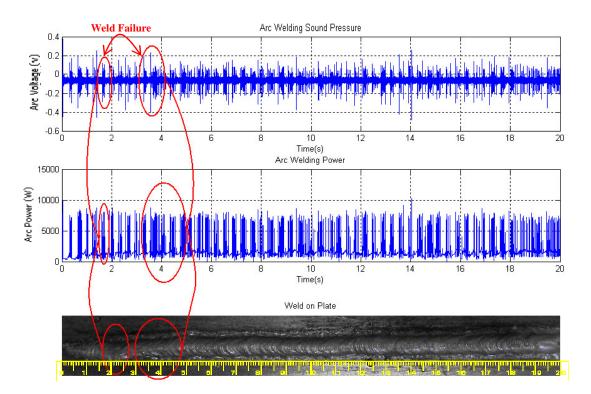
Weld Defect Identification of power and sound pressure (Test 1)
